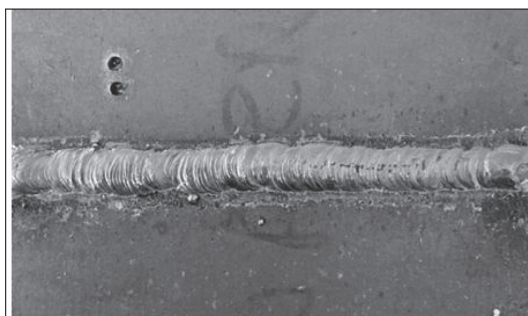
The measured values of the zinc layer thickness on the seam welded with rutile electrode of two S235 steel plates
